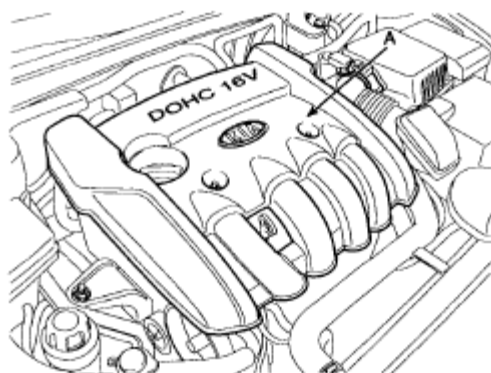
Identifying Intake Air Hose And Air Cleaner
